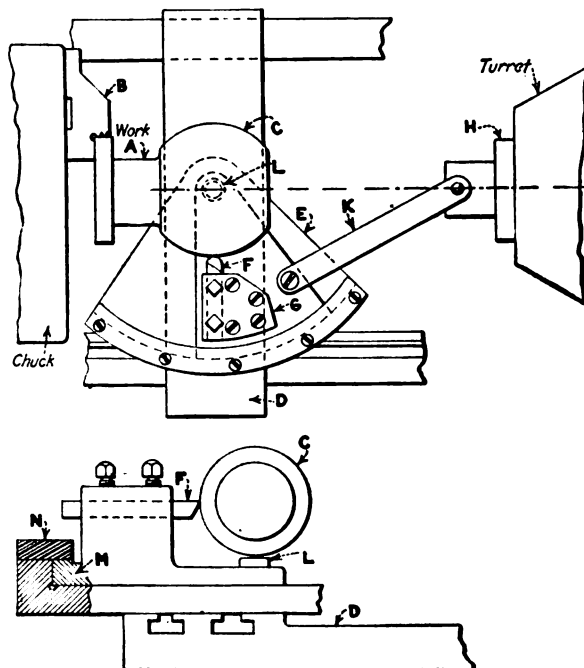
CURVED GENERATING ATTACHMENT FOR TURRET LATHE
